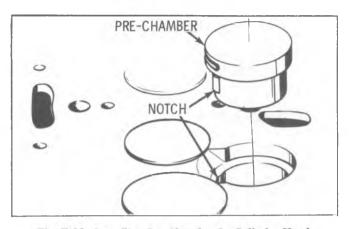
Installing Pre-Chamber In Cylinder Head
